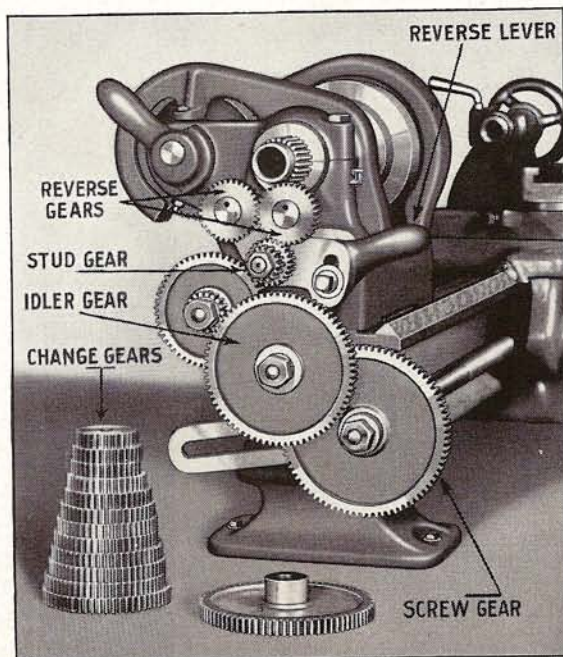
End view of 9-inch "Workshop" Lathe showing change gear equipment for cutting screw threads and for power turning feeds.
